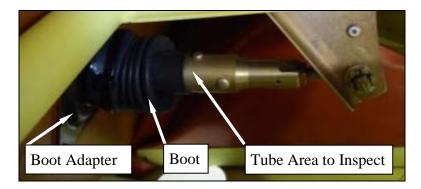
Lateral cyclic control tube assembly (looking inboard)
